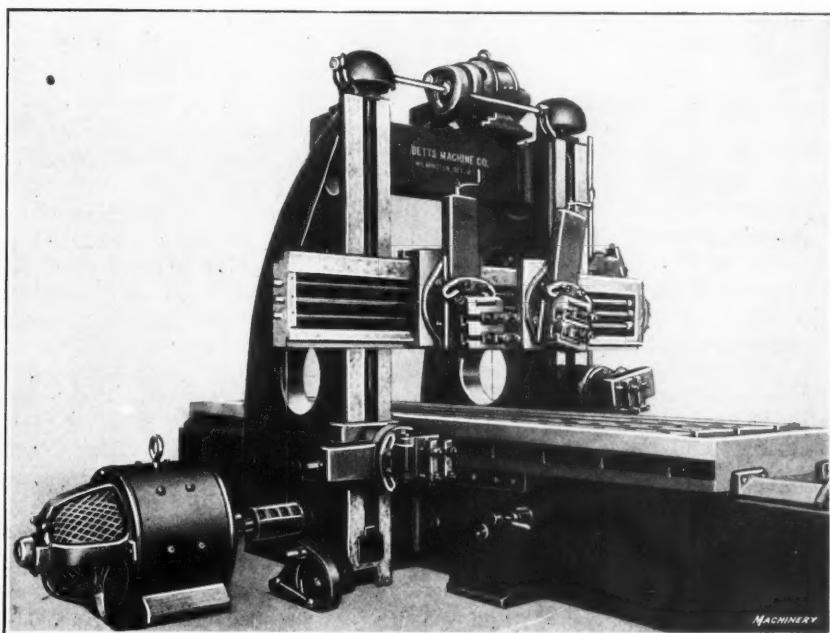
Westinghouse Reversing Planer Motor, 20 H. P., 250 to 1000 R. P. M., driving a 48 by 12 Betts Planer
